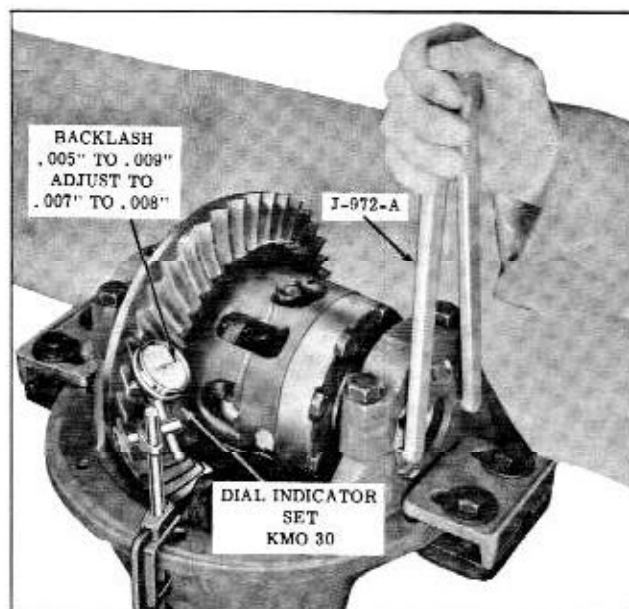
Adjusting Backlash (Anti-Spin Shown)
